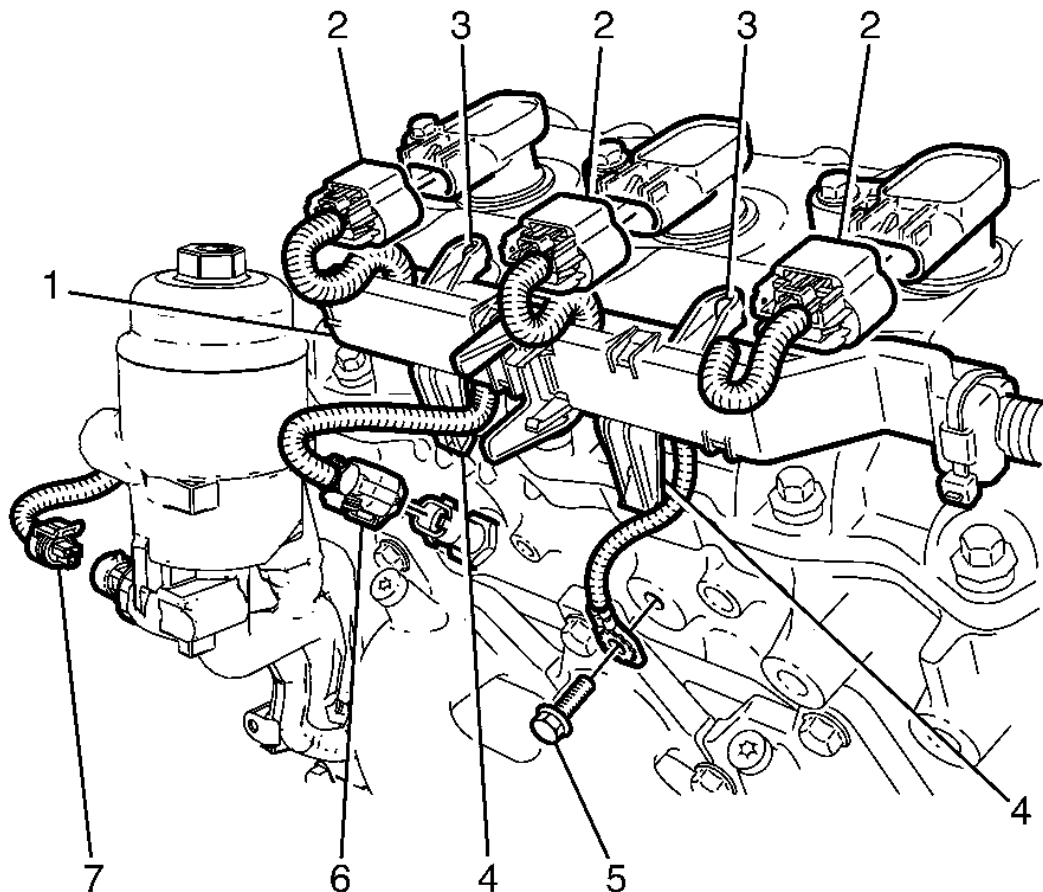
View Of IMRC, Injector Harness & Purge Solenoid Electrical Connectors
